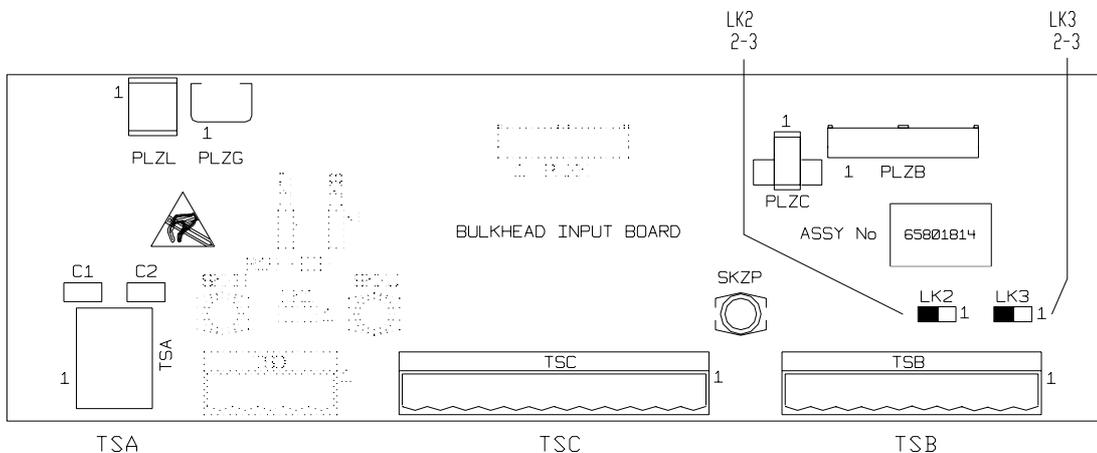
X-band Bulkhead Transceiver (later version) - Input Board Details
